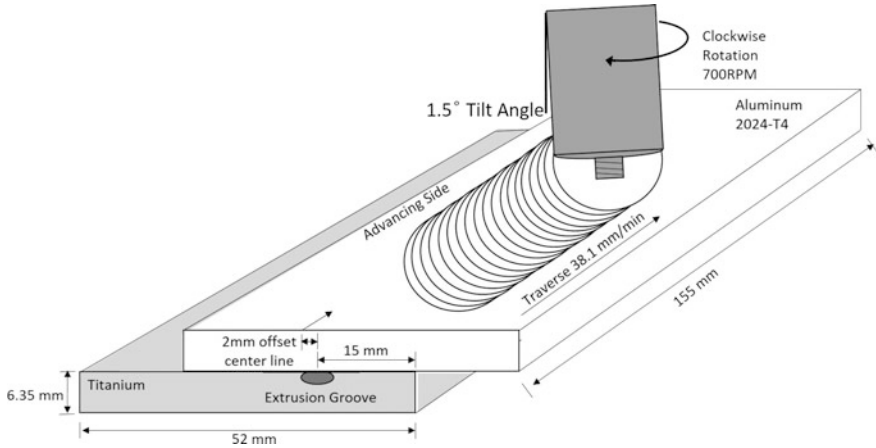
Friction stir extrusion setup for joining aluminum to titanium
